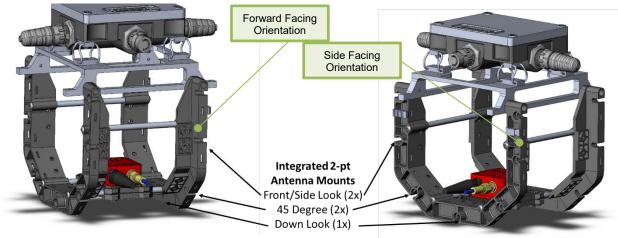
Mounting Locations on the Antenna Mounting Frame
